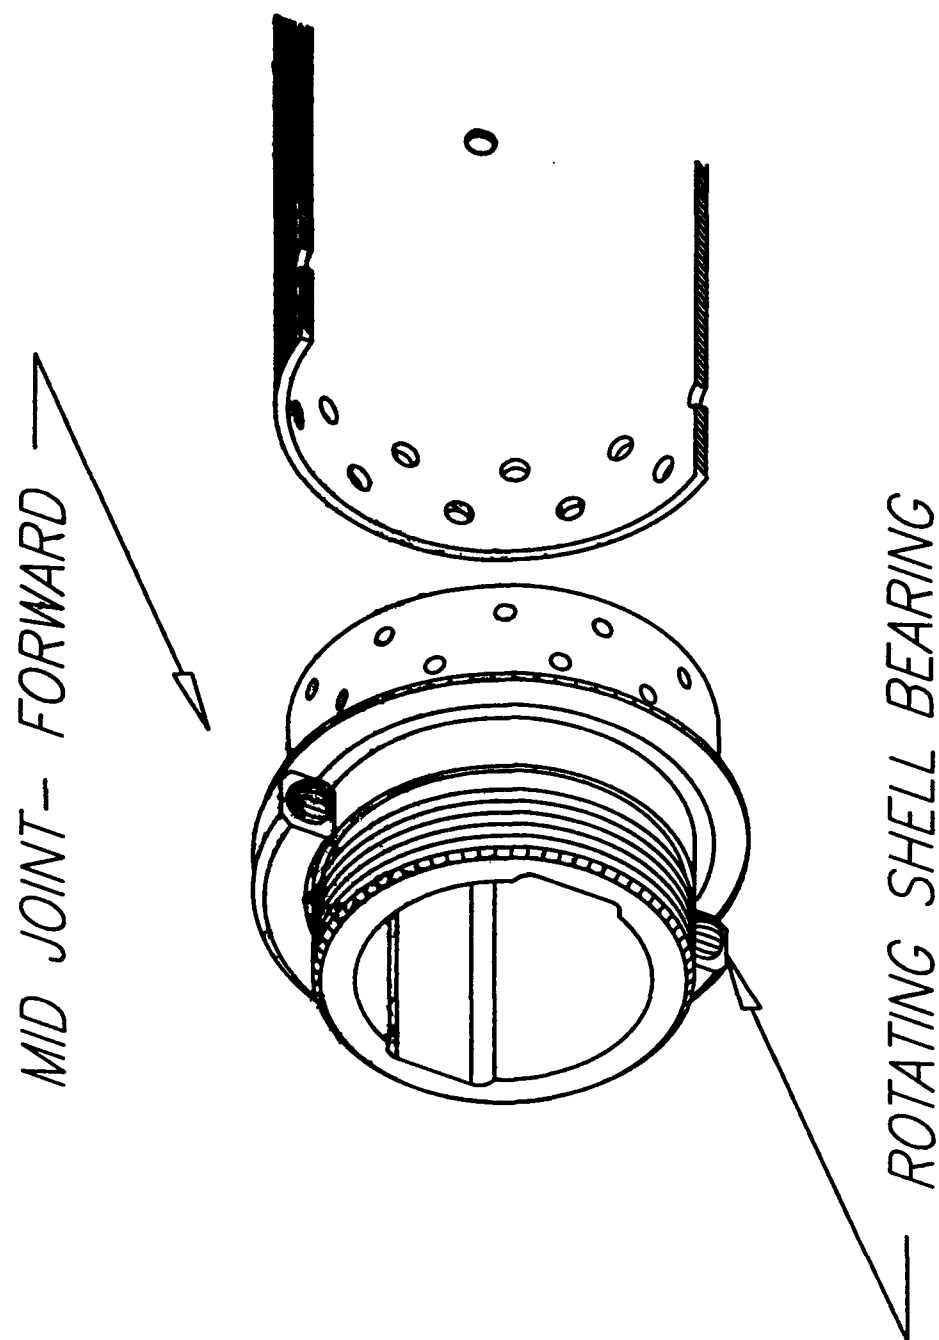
Detail of the Mid-joint, Showing the Mounting of the Aft Bearing and the Aft End of the Inner Shell
